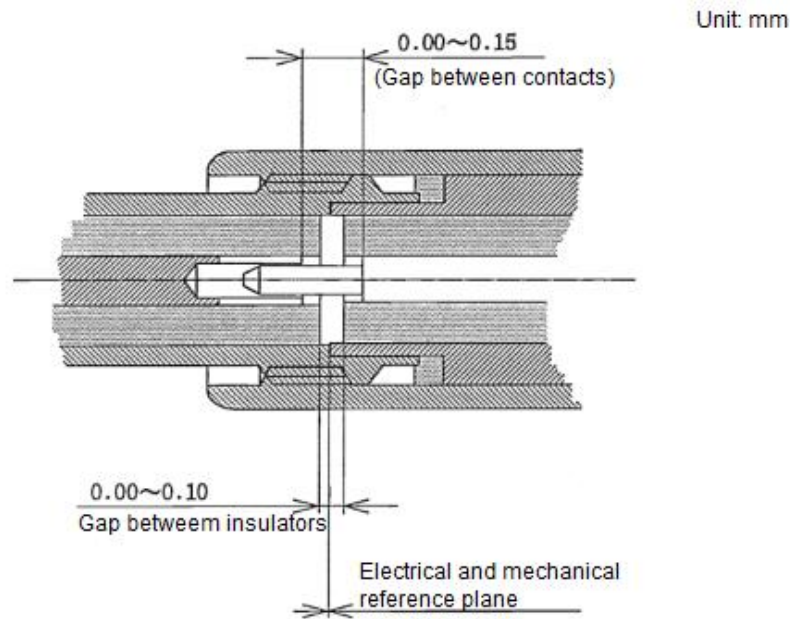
Mating Part of Standard Test Connector (SMA Series: 50Ω)
